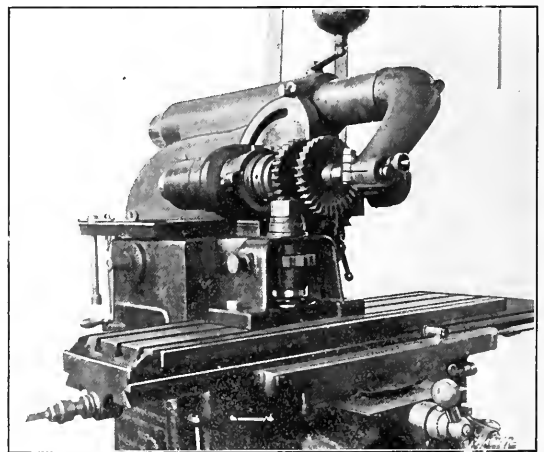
Bemis Auxiliary Head set up on the Milling Machine
